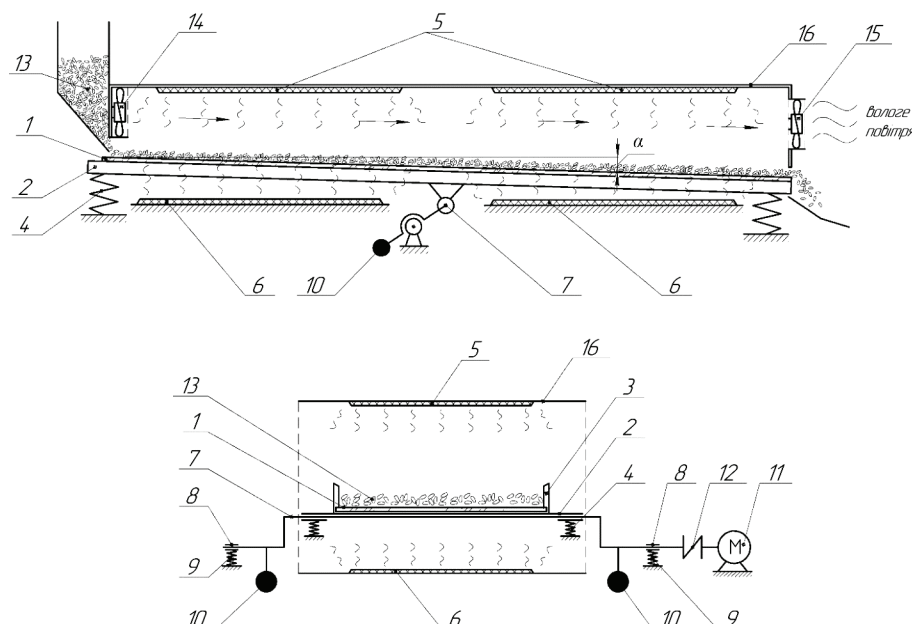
Scheme of the conveyor tray infrared dryer: 1 – tray; 2 – spring-loaded platform; 3 – flanges; 4, 9 – elastic elements; 5, 6 – infrared emitters; 7 – eccentric shaft; 8 – support units of the vibrator; 10 – counterweights; 11 – electric motor; 12 – elastic coupling; 13 – grain products; 14, 15 – fans; 16 – working chamber of the dryer; α – angle of the vibrating tray
